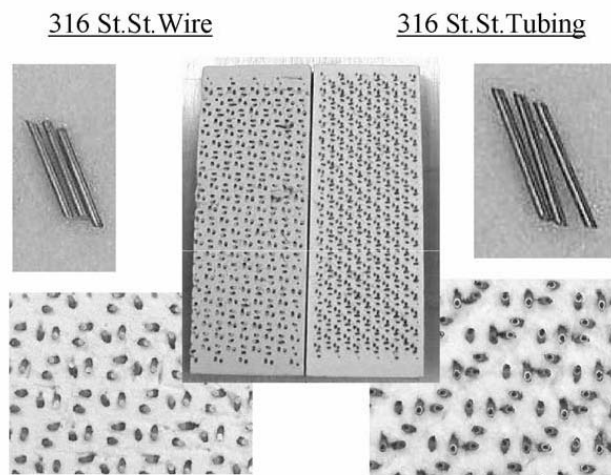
Core performs fabricated using solid pins and hollow tubes, illustrating the flexibility in manufacturing
